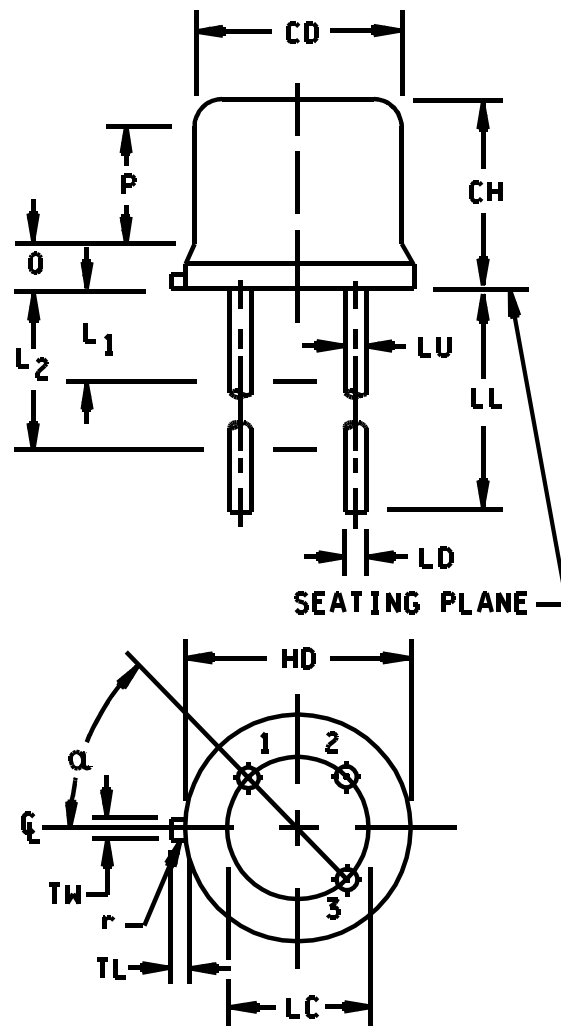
Physical dimensions TO-39, TO-5, TO-46.
